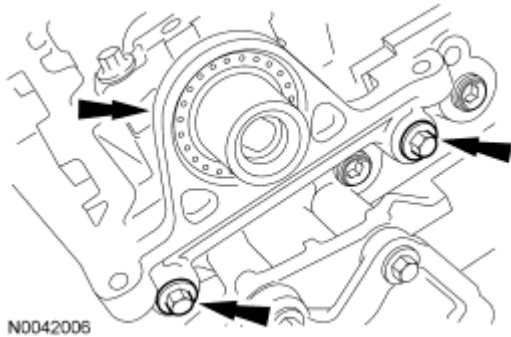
Locating Camshaft Oil Seal Retainer And Bolts
